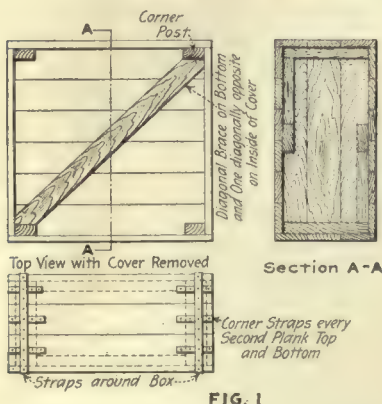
PACKAGE FOR LIGHT MACHINERY
